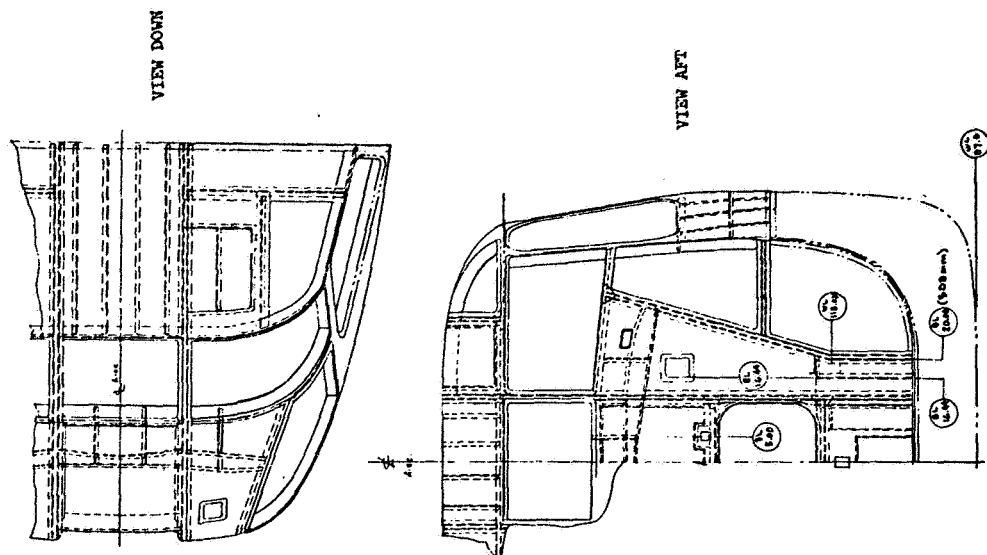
COMPOSITE COCKPIT STRUCTURE. AUXILIARY VIEWS.
